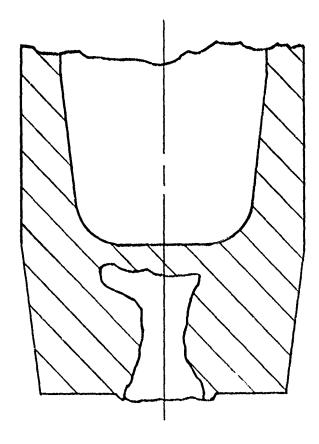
Representative Sketch of Base Defect in XM804 Pressure Castings
